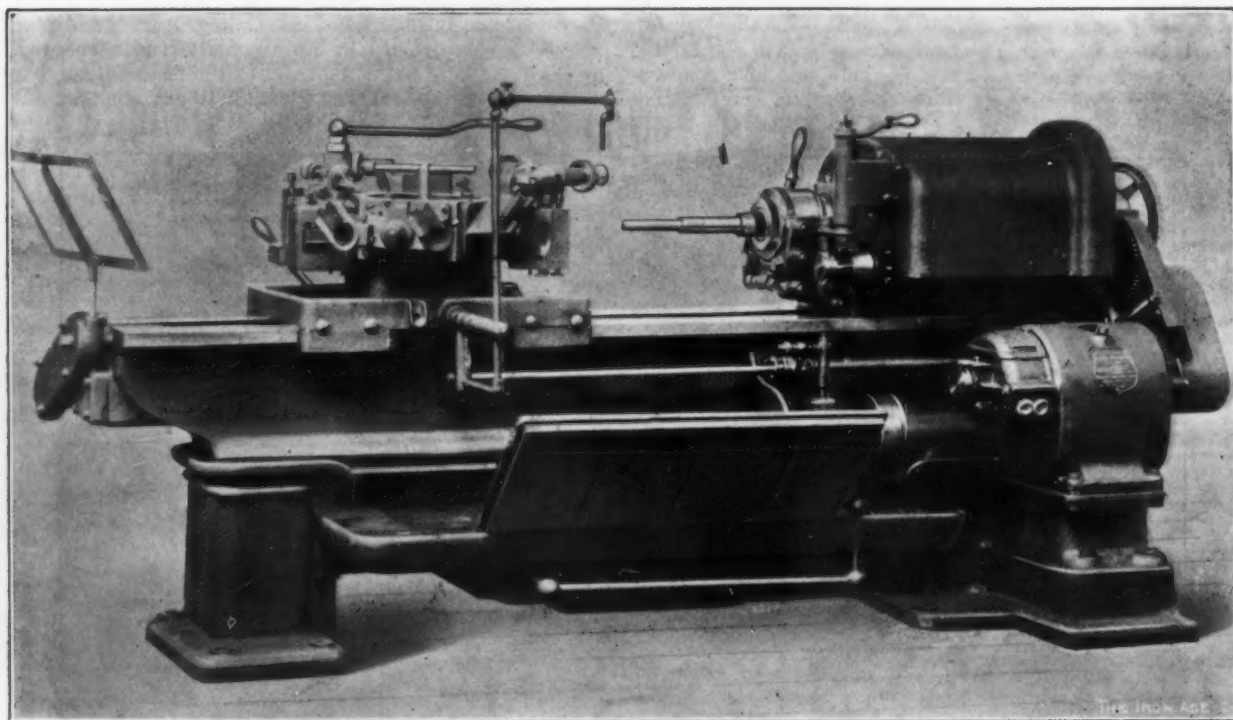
Rear View of the Herbert Hexagon Turret Lathe, Showing the Motor Drive.
